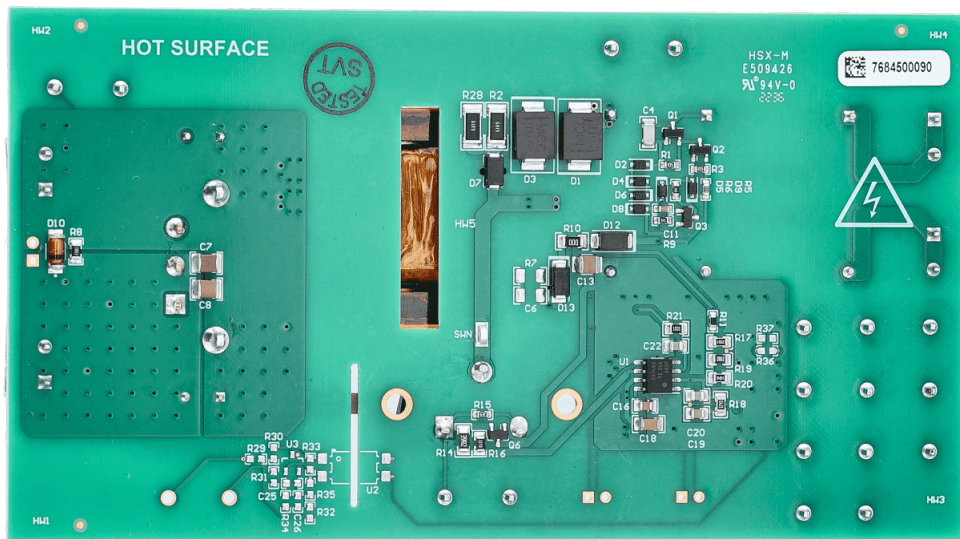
UCC28C56EVM-066, HVP066A, Bottom View
